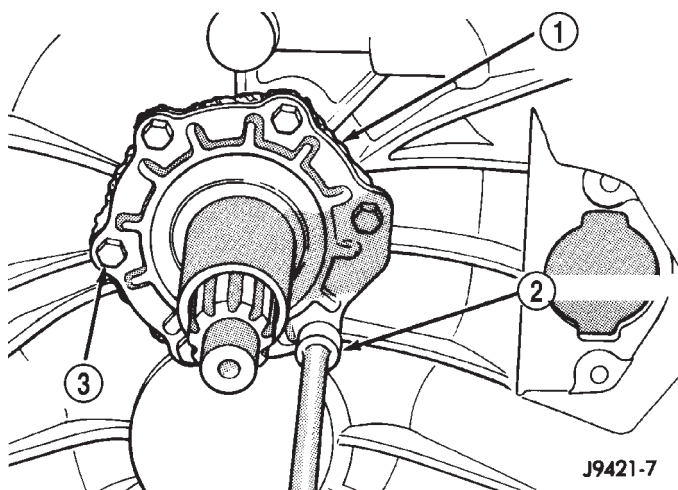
Installing Input Shaft Bearing Retainer Bolts
